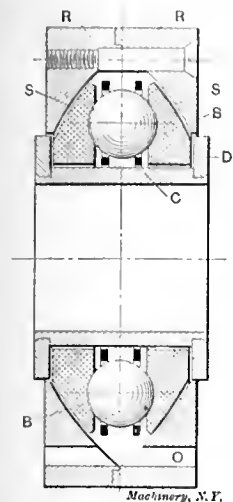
Bearing Designed for Axial Thrust in Either Direction
